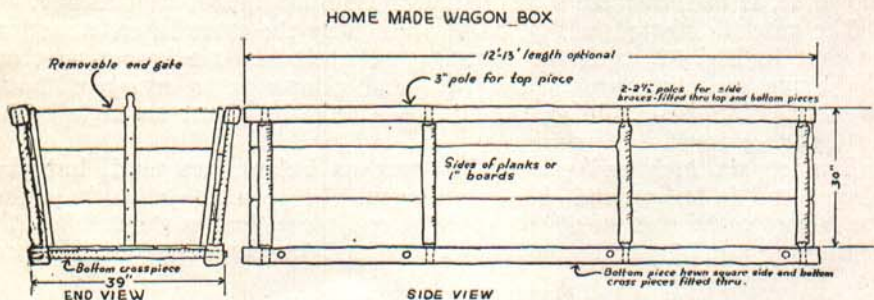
This wagon box is made of poles and boards or planks. It is easily made and will haul a big load.
